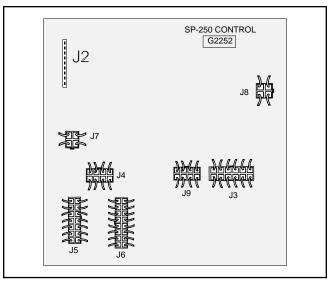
A - Plug J2 Location on G2252 PC Control Board.
